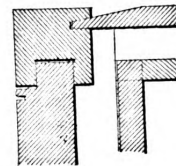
Section through Rear Angle of Cabinet and Drawer.
